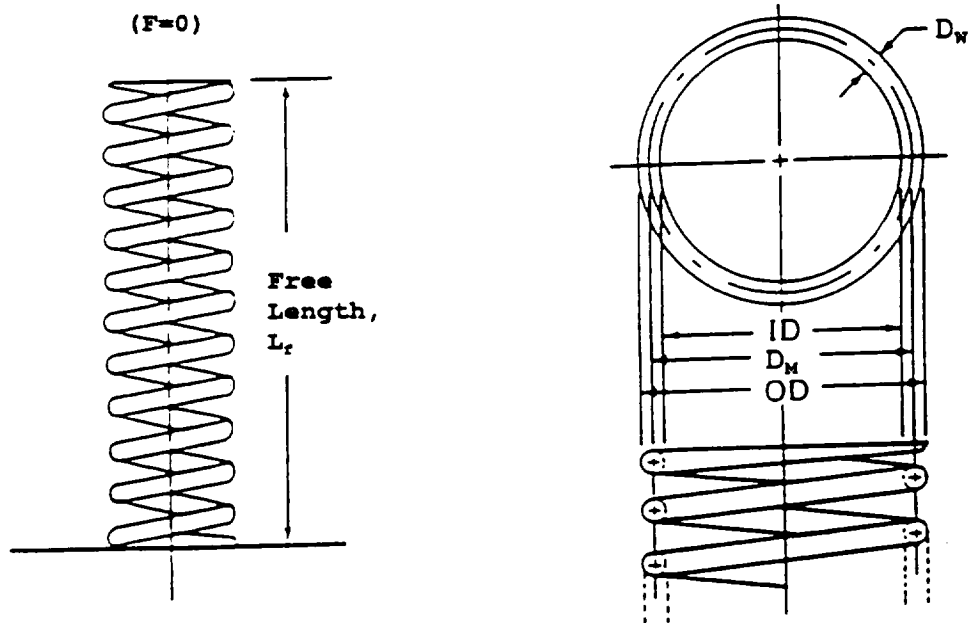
HELICAL COMPRESSION SPRING FRONT AND TOP VIEW
